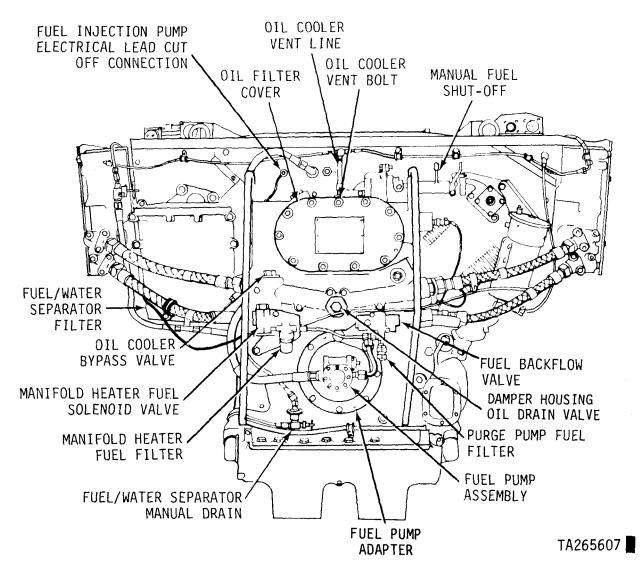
AVDS.1790-2D engine assembly — front view.
